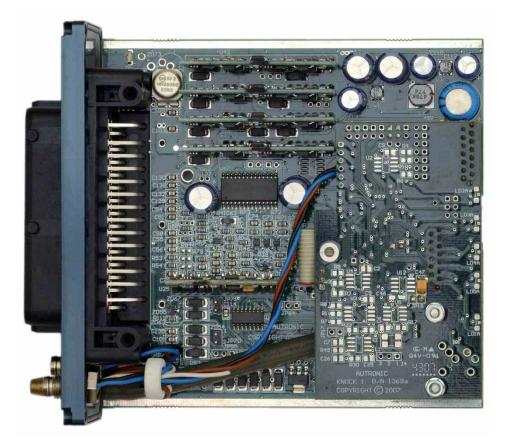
Knock Processor Board installed on SM4MR ECU (same for SM3MR)
